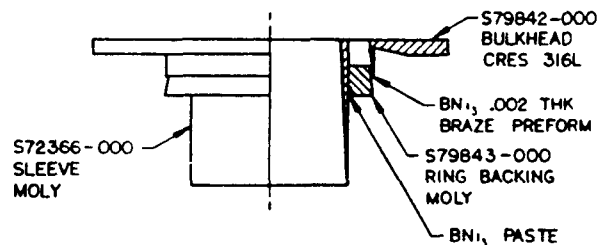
(HEADER ASSEMBLY REQUIREMENTS)
